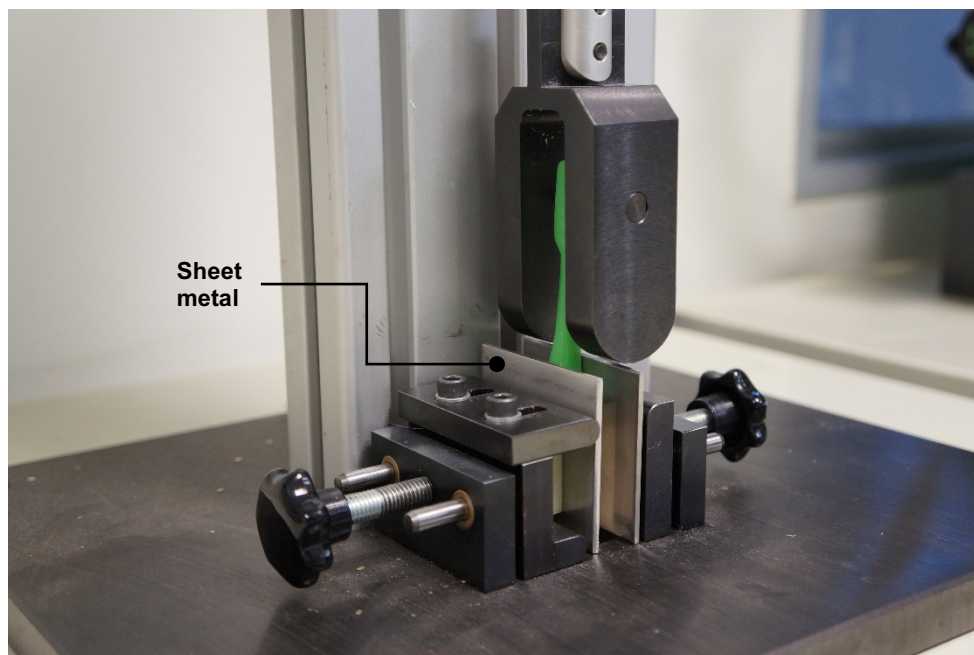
Picture showing the sheet metal parts introduced to raise the placement of the fastening edge for the toothbrush.
